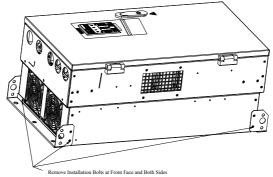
Disassemble Top and Bottom Mounting Holes
